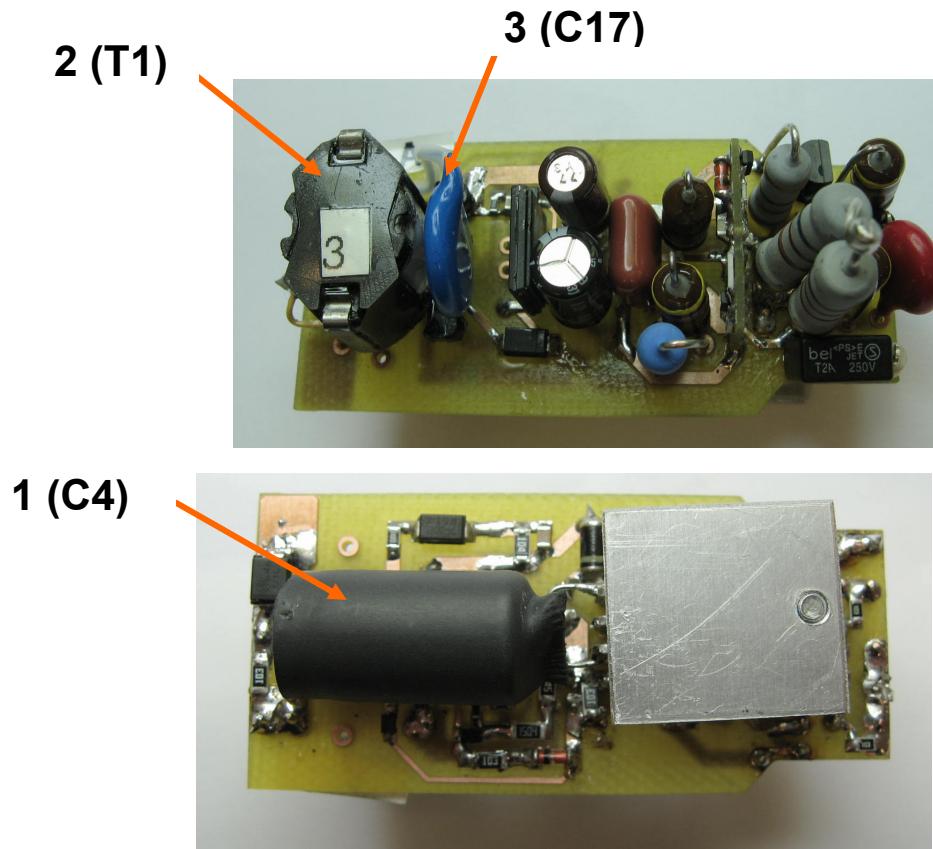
Populated Circuit Board Photograph Single Sided PCB (Bottom View).
